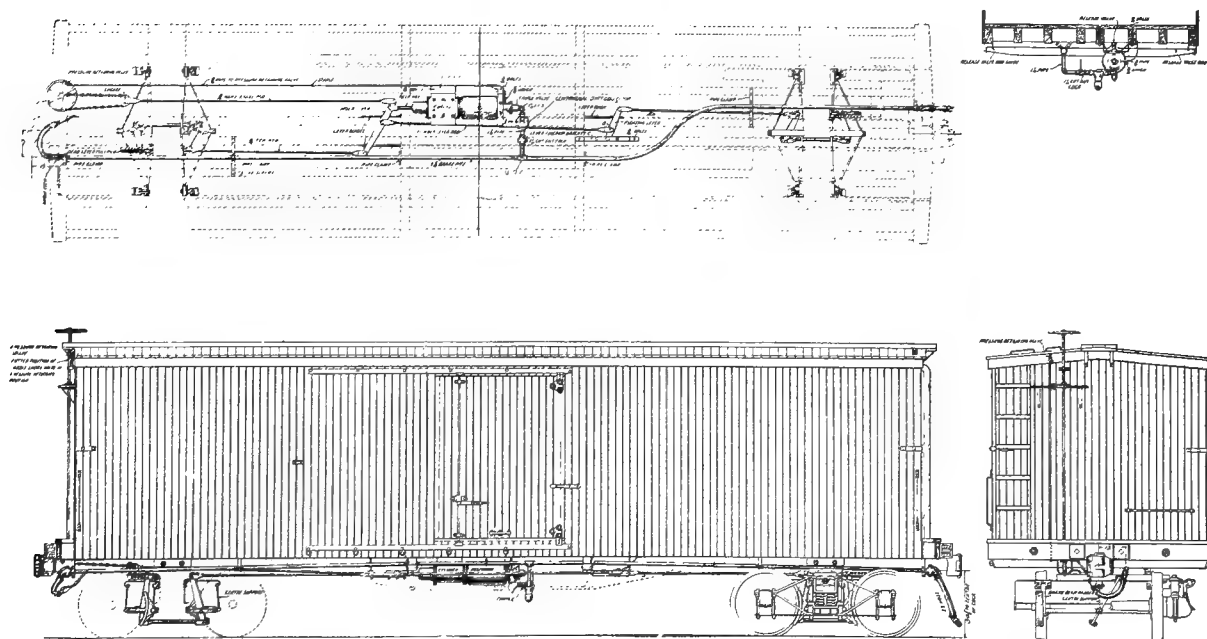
Westinghouse Single Cylinder Air Brake Equipment Applied to a Freight Car.
